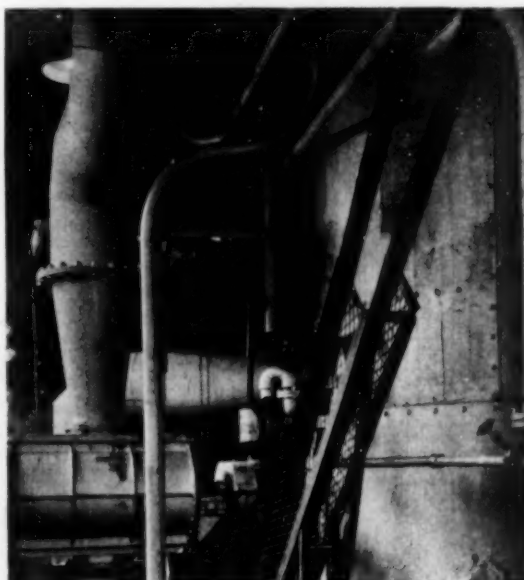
Left: Arc Welded Stack and Piping; Holes in Floor Above Are for Future Expansion
